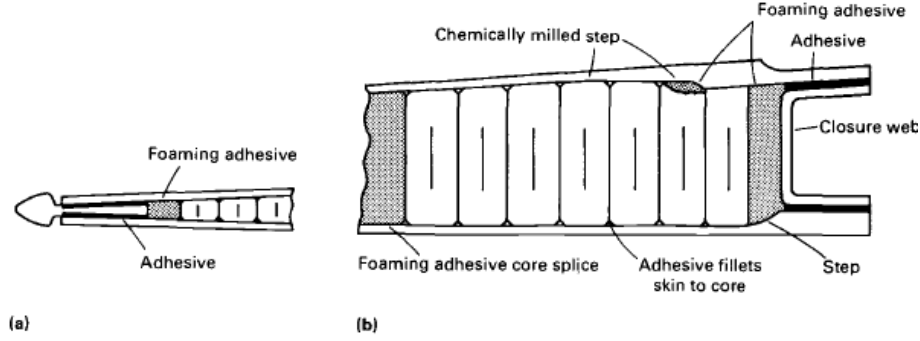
Diagram of an example of honeycomb assembly [4]
